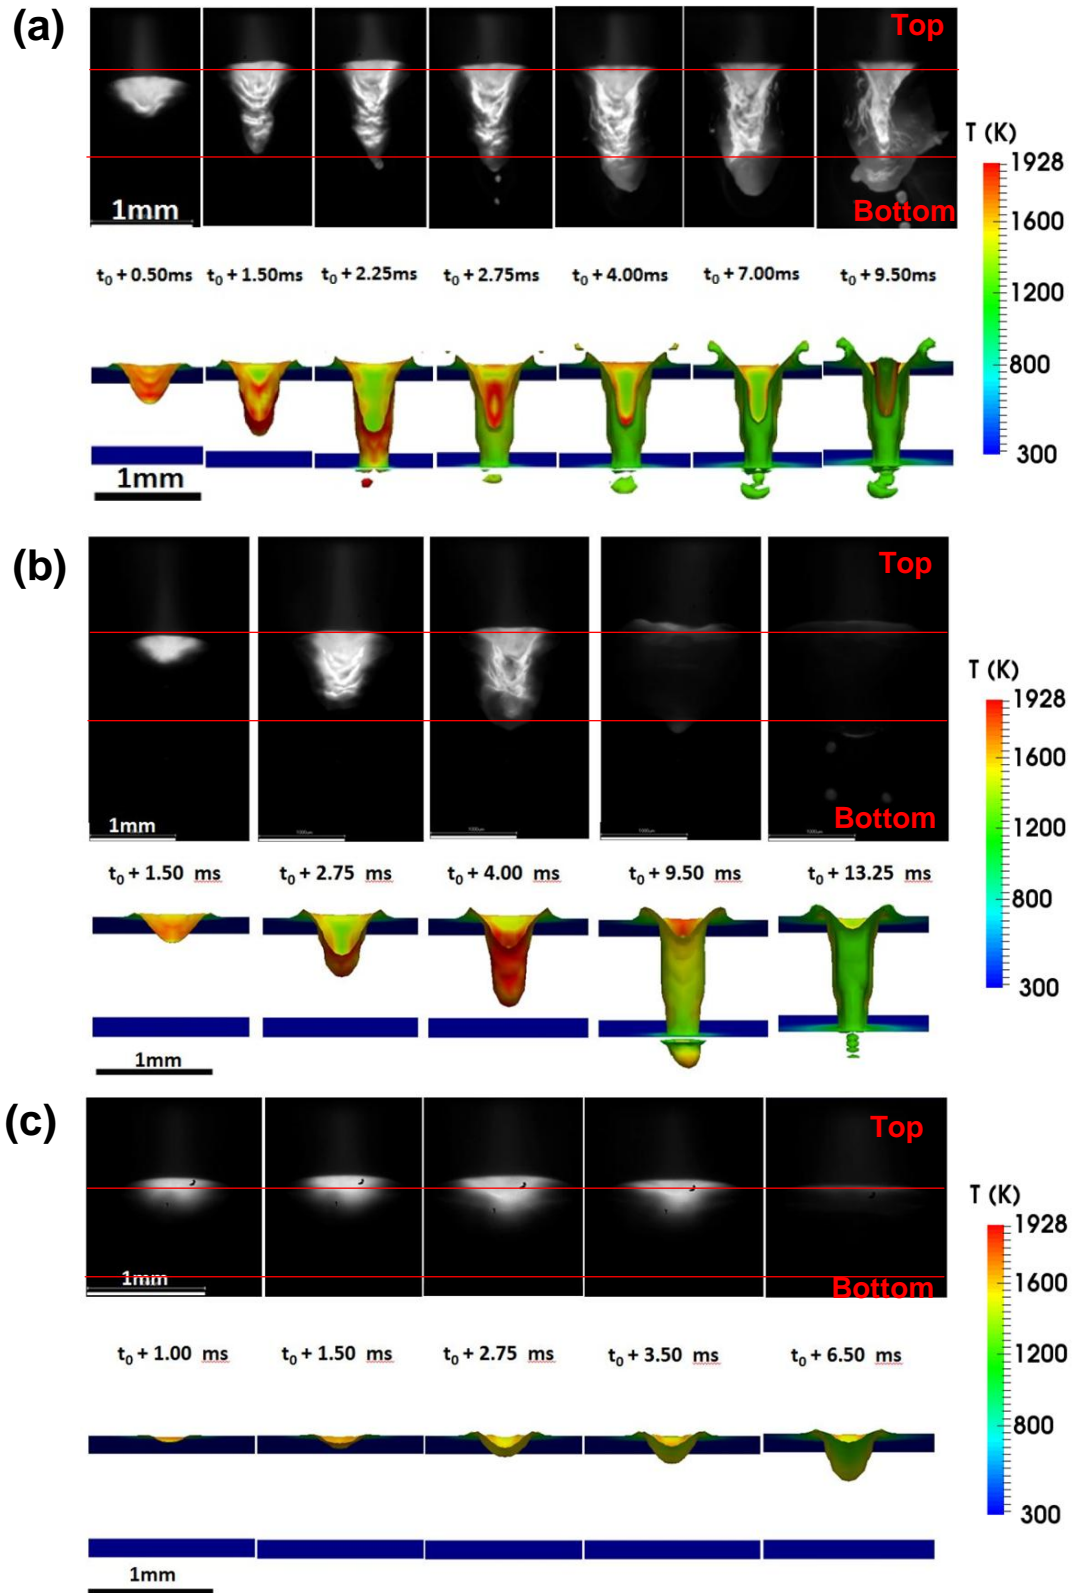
Comparison of liquid/solid interface during keyhole formation between modelling and high speed camera imaging using 100mm/s welding speed and (a) 3000W, (b) 2000W and (c) 1000W. Note that t_0 refers to initial time at which the laser contacts the weld plate, i.e. (a) $t_0 = 2.75\text{ms}$, (b) $t_0 = 2.50\text{ms}$, (c) $t_0 = 2.00\text{ms}$.
